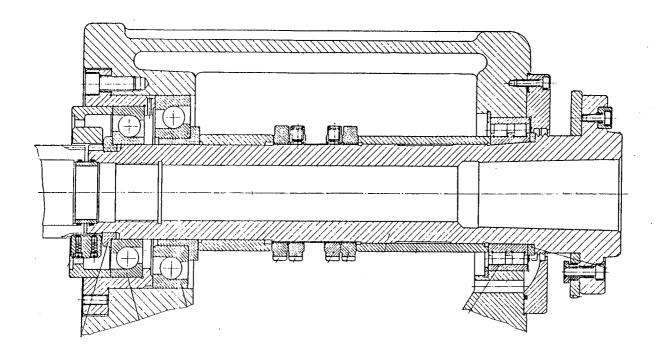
Spindle of The Lathe Mode by TEZSAN (Ref. 29)
